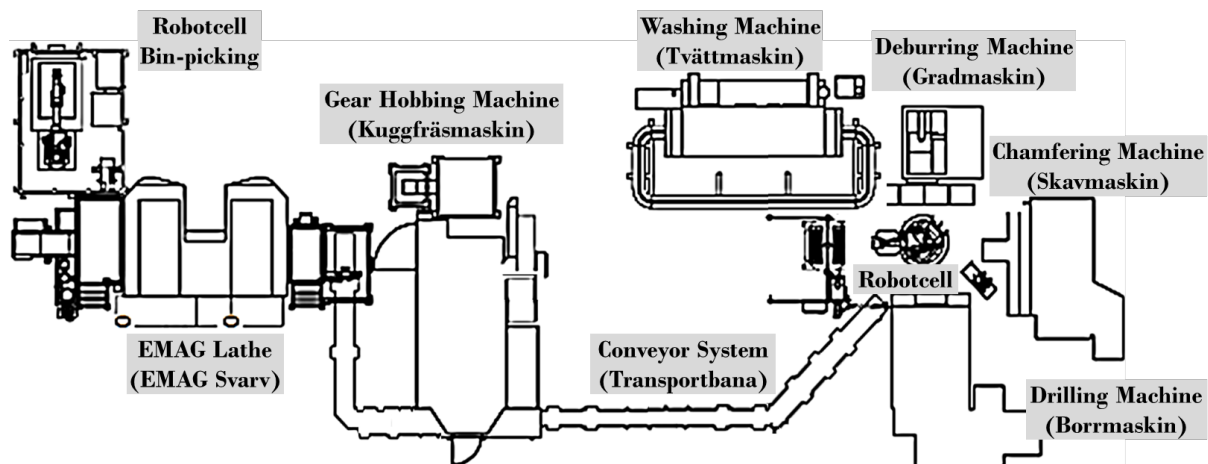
Layout of the machining line for timing gear production at Volvo GTO.
